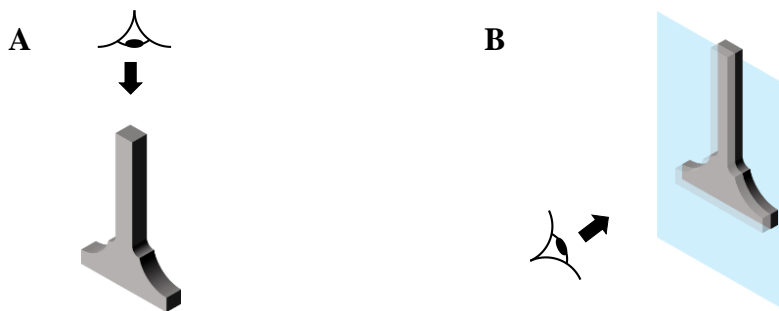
Diagrams showing the types of fractographic observation: a) fracture surface and b) crack path.
